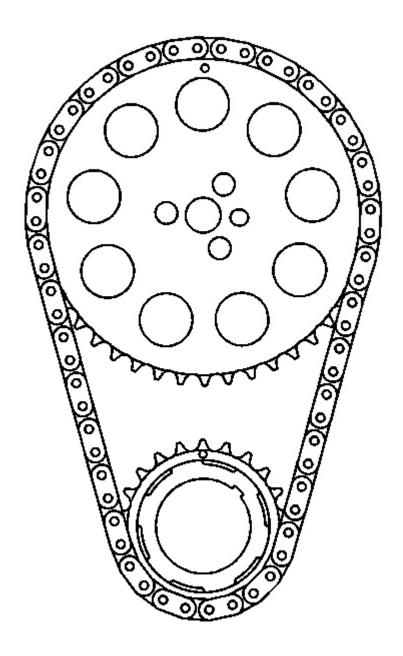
View of Crankshaft/Camshaft In Position For Number 1 Piston At TDC Courtesy of GENERAL MOTORS CORP.
